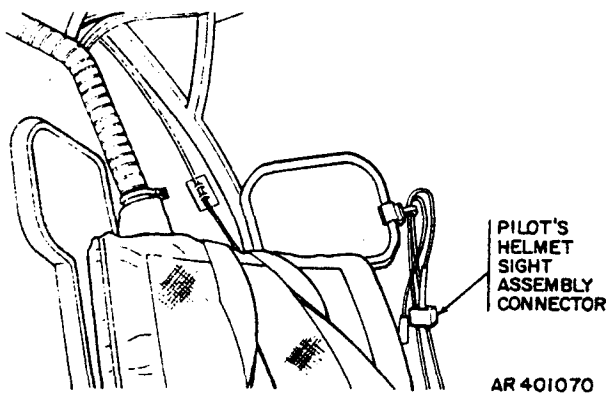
Location of pilot's connector for helmet sight assembly cable
